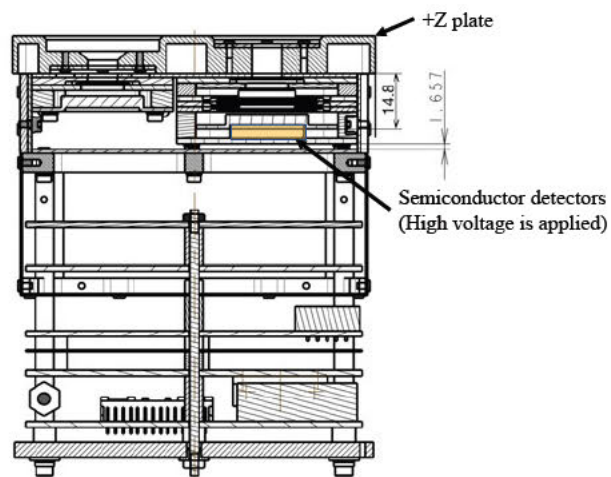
High voltage parts in the sectional view of PINO module
